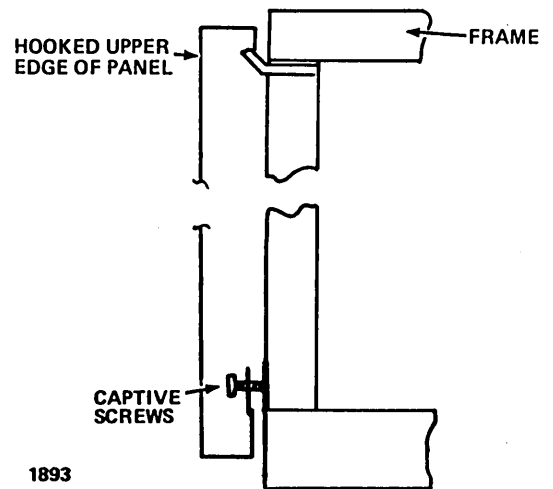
BU281 Mass-Storage Cabinet Side Cover Attaching Detail
